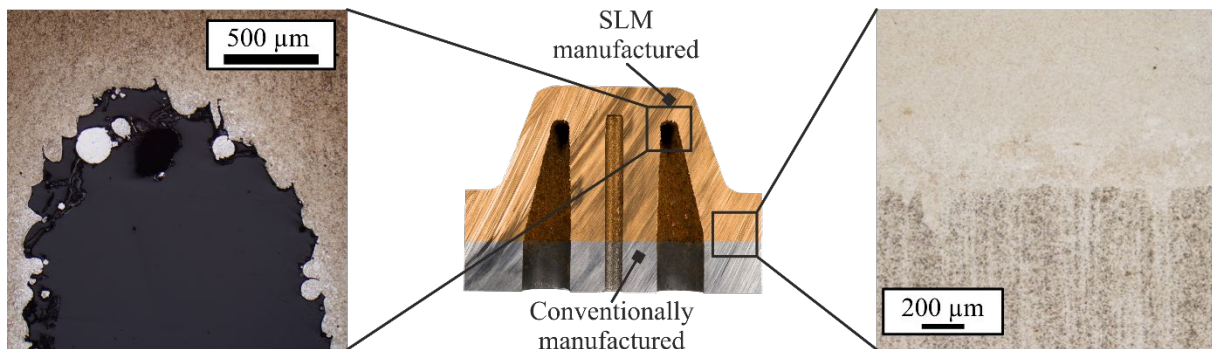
Tool cross section: left: Inner channel surface, right: Joint zone between bulk and L-PBF section
